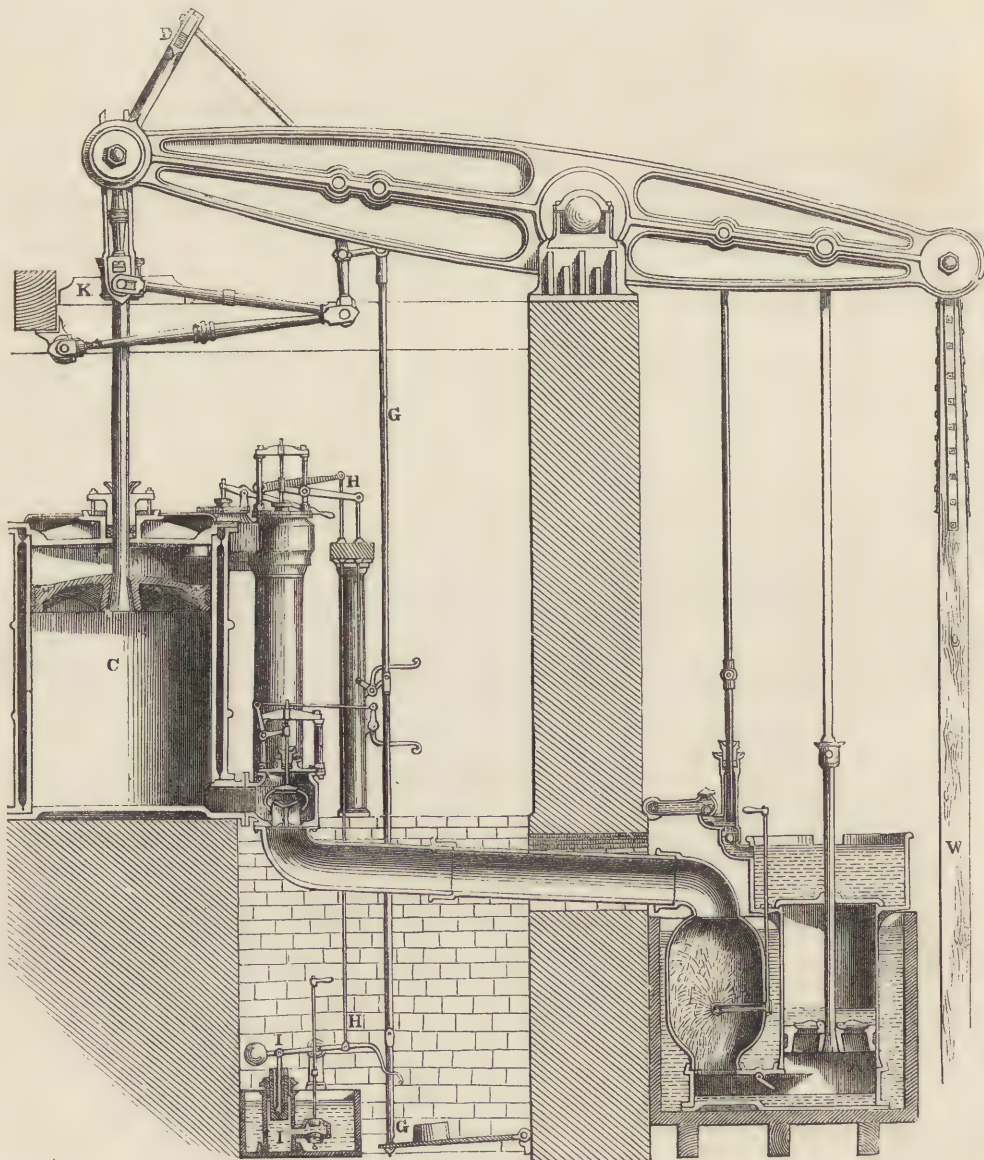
CORNISH OR SINGLE-ACTING PUMPING ENGINE.
